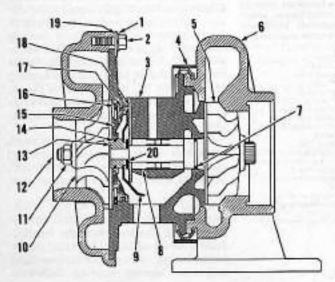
Sectional view of Schwitzer turbocharger showing component parts and their relative positions.
